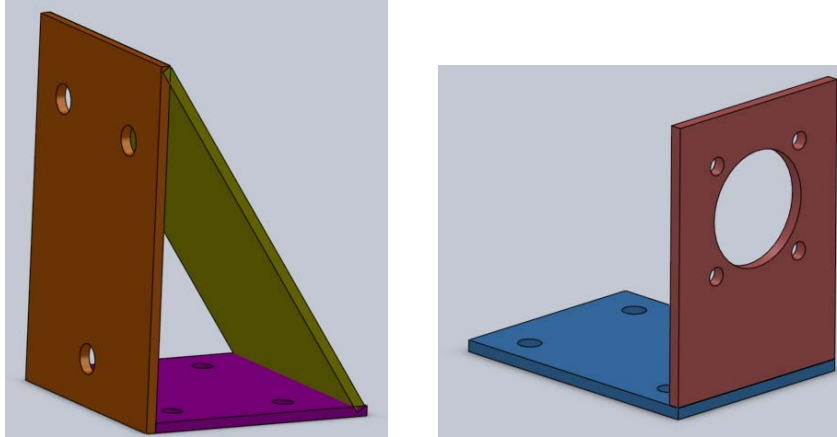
Left: Crankshaft Motor Mount Bracket, Right: Stepper Motor Mount Bracket.
